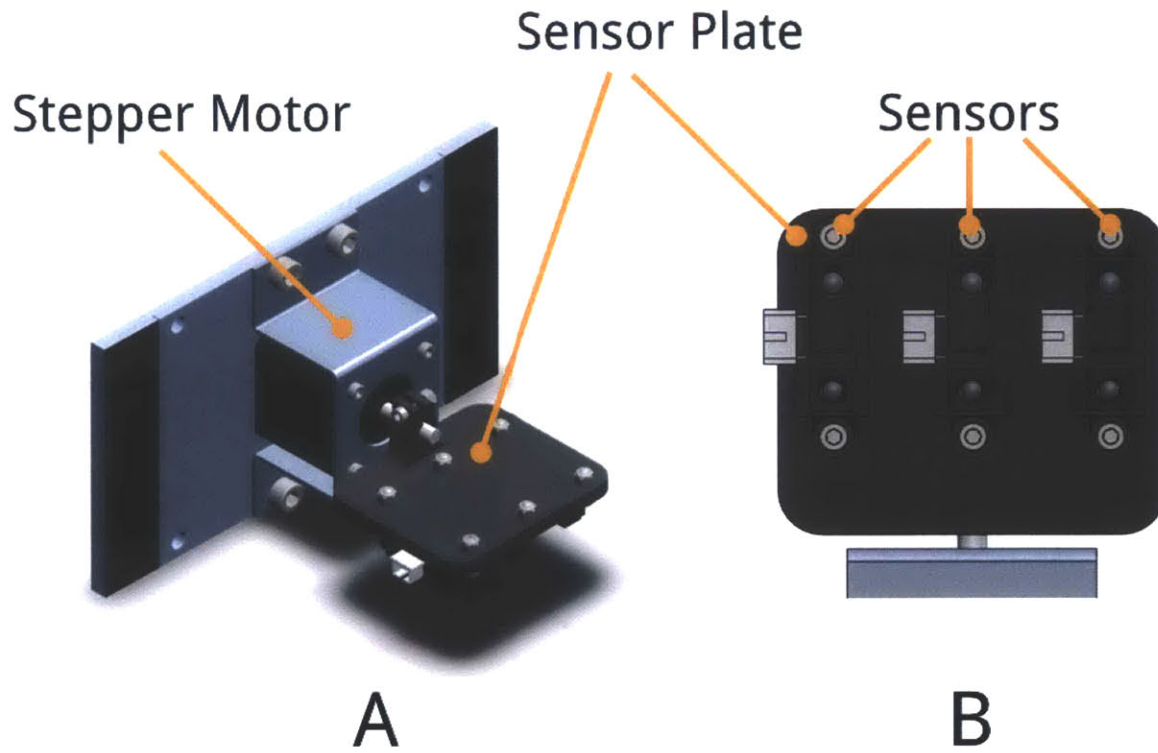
Figure A shows the sensor plate assembly mounted to the carriage of the Y linear stage. Figure B shows the bottom of the sensor plate with three sensors mounted in a linear array.
